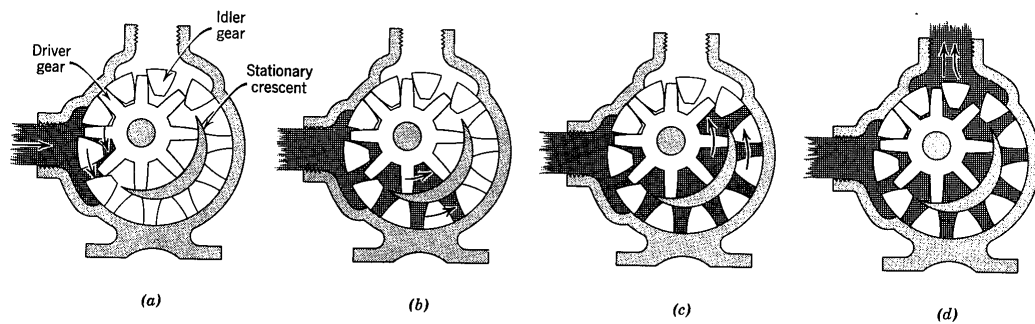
Internal gear pump and its operation. (Courtesy Viking Pump Co.)
